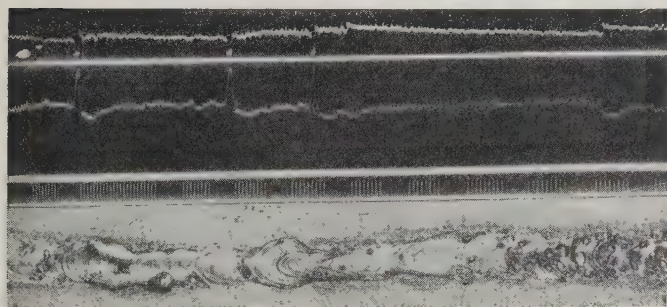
Steady welding. 140 amp. 29 volts.
